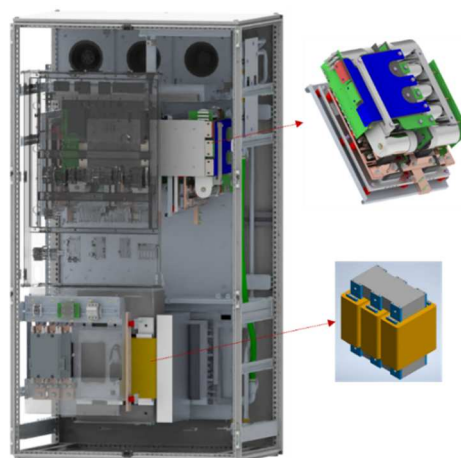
Mechanical drawing of the Vienna rectifier (690V/1800A/2150kW AC input), up to 1500 V DC output
